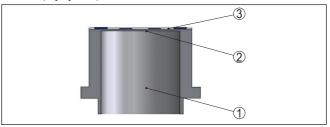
Configuration of the measuring system with strain gauge (DMS) sensor element
